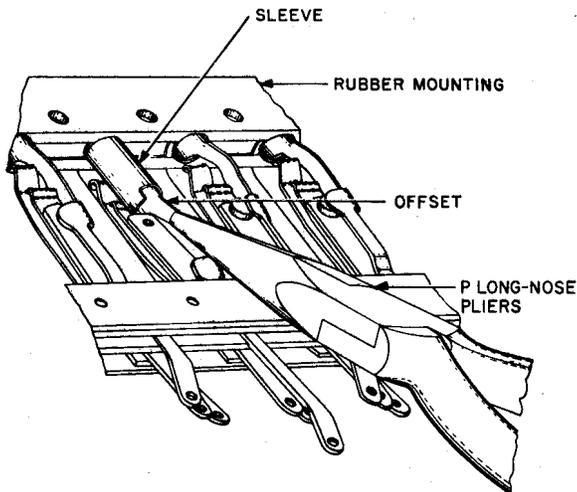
Method of Forcing Sleeve Forward into Rubber Mounting on 92-, 229-, and 292-Type Jacks
